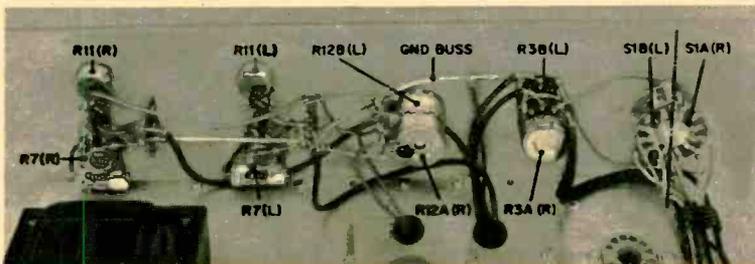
Rear of front panel. Mount controls, terminal strips, components and hookup buss and shielded wires before attaching panel to chassis. Wires to S1A and S1B come from the jack panel at the rear and should be installed after panel is in place.
